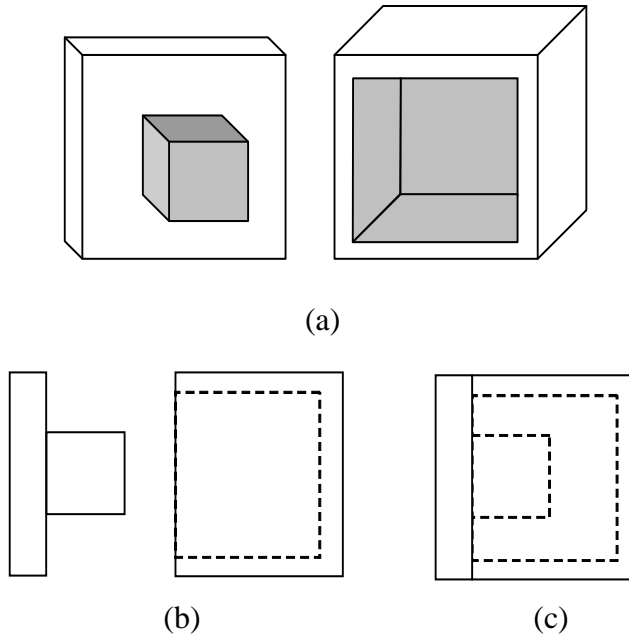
Invisible surfaces of two visible parts. (a) view of each individual part. Invisible surfaces in grey. (b) Exploded side view. (c) Side view of parts assembled
